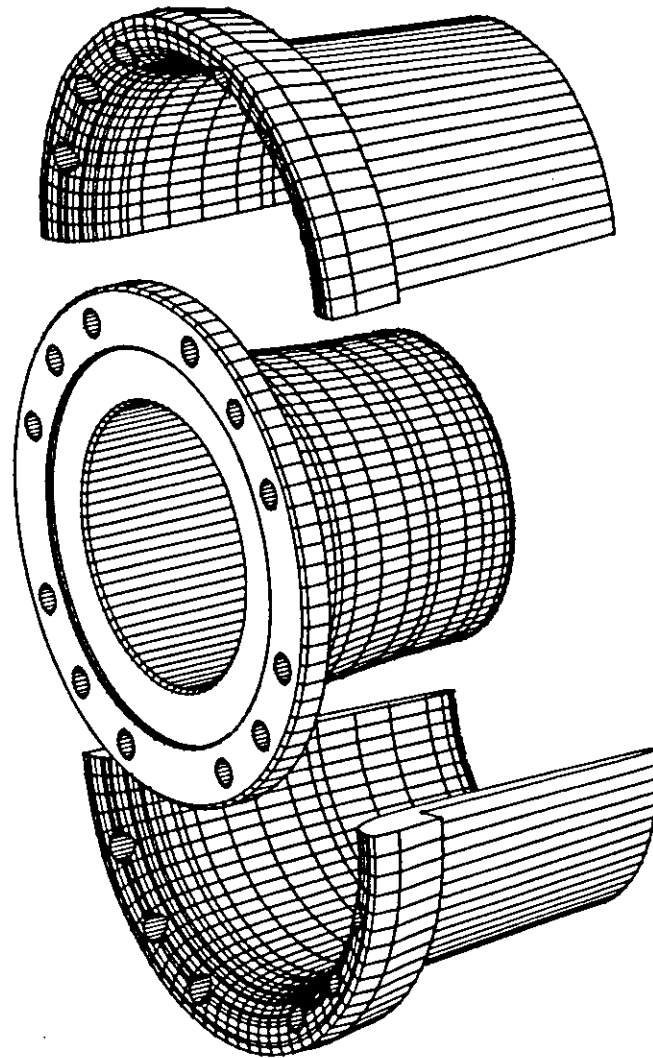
Steel Flange Configuration For the Blade Root.
